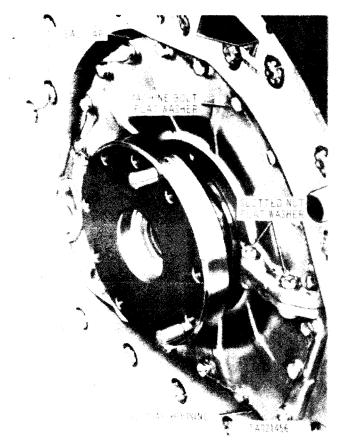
Removing or installing oil seal cup and oil seal housing mounting bolts.
